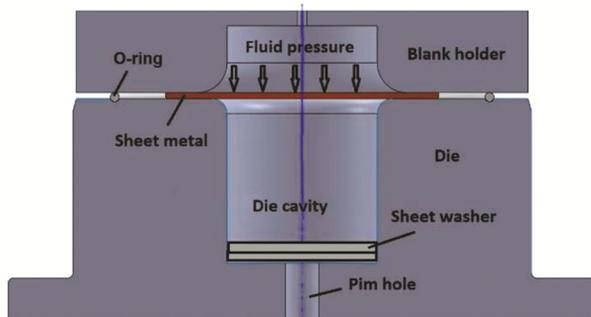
The die used on performing sheet hydroforming process with female die.
